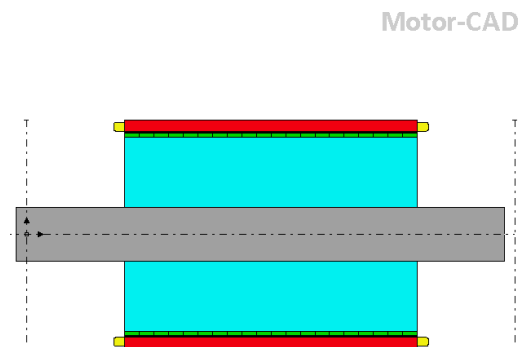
Axial motor for the Neodymium machineFigure 3.7: Axial motor for Ferrite machine
